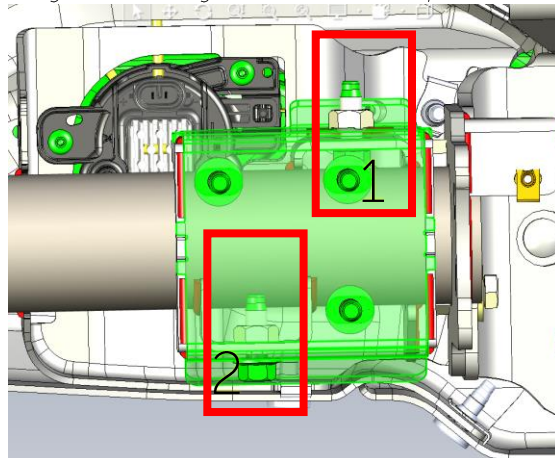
Backside AEV Frame Bracket w/ Bolts
